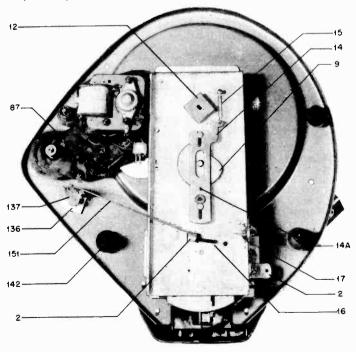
BOTTOM VIEW OF RECORD CHANGER
